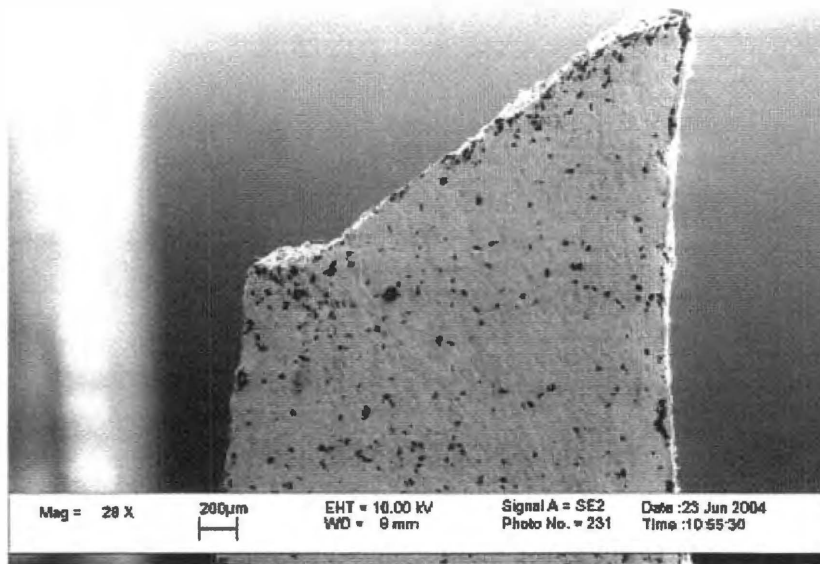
The fractography micrograph of undoped Zircaloy-4 (A-Zr-1-1) specimen developed at low magnification, showing a view of the side of the fracture end which contained dirt particles identified as dark spots
